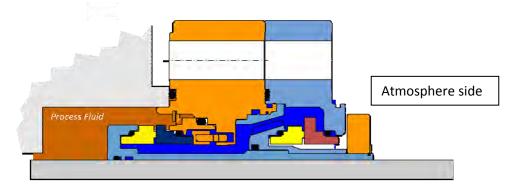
Diagram of a typical double mechanical seal showing inboard seal faces sealing to the process fluid, the outboard seal faces sealing to atmosphere, and a (blue) barrier fluid in between.
